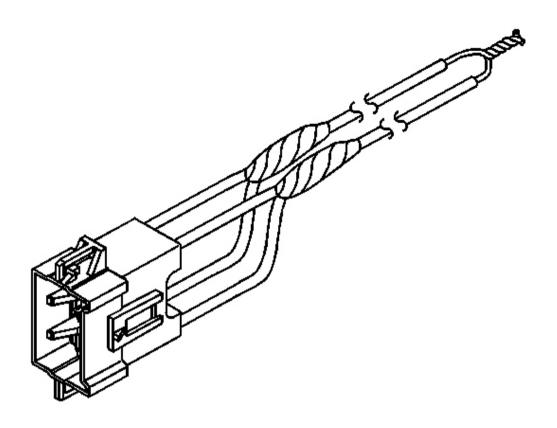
Insulating Connection With Electrical Tape Courtesy of GENERAL MOTORS CORP.
